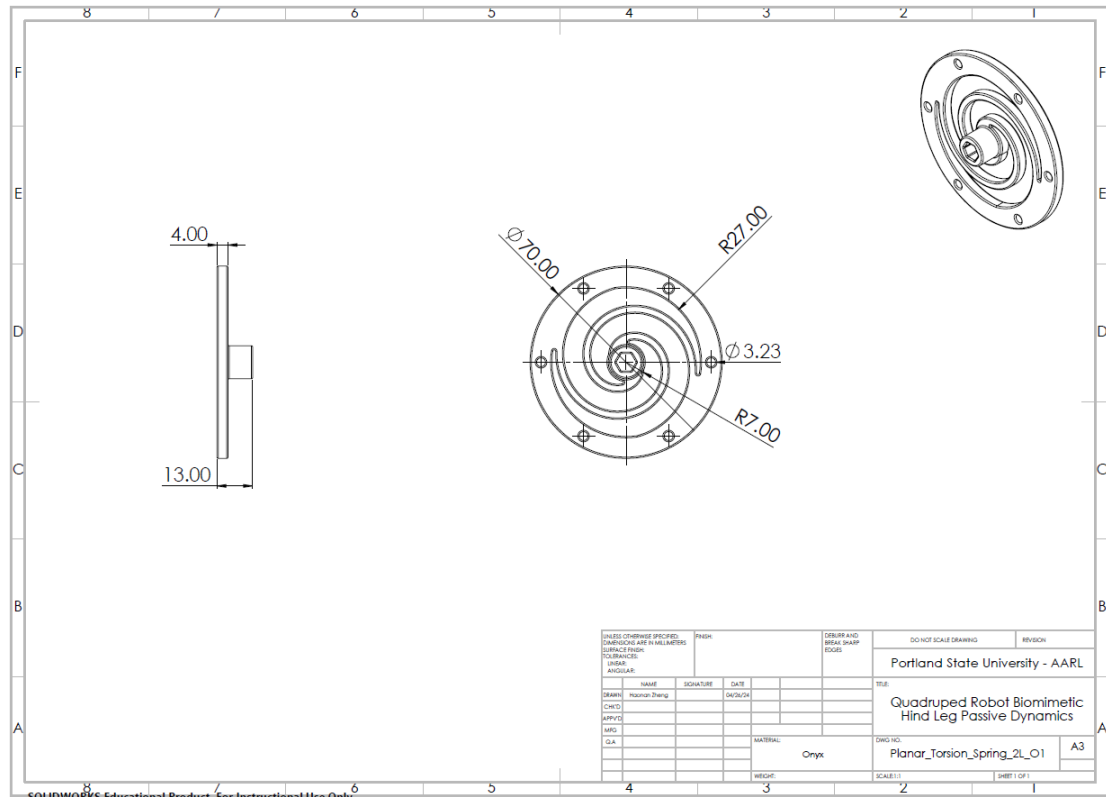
3D printed torsion spring configuration 2L2LT4ST
